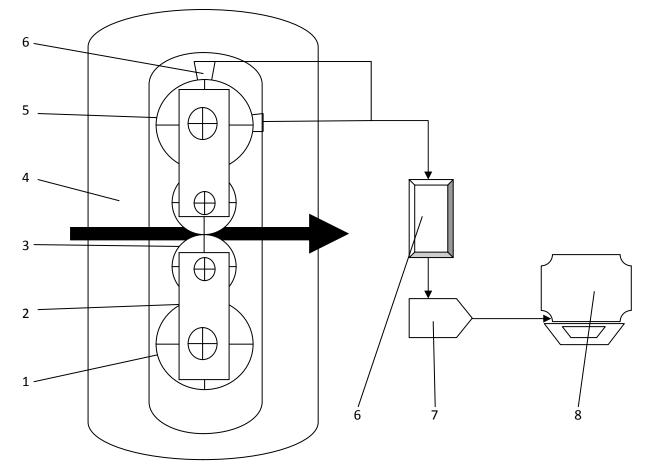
Schedule for parameters measured in the cold rolling mill machine: 1-work roll; 2-rolls support; 3-beckup roll; 4-mill stand (frame); 5-horizontal accelerometer; 6-vertical accelerometer; 7-signal preamplifier; 8-process computer
